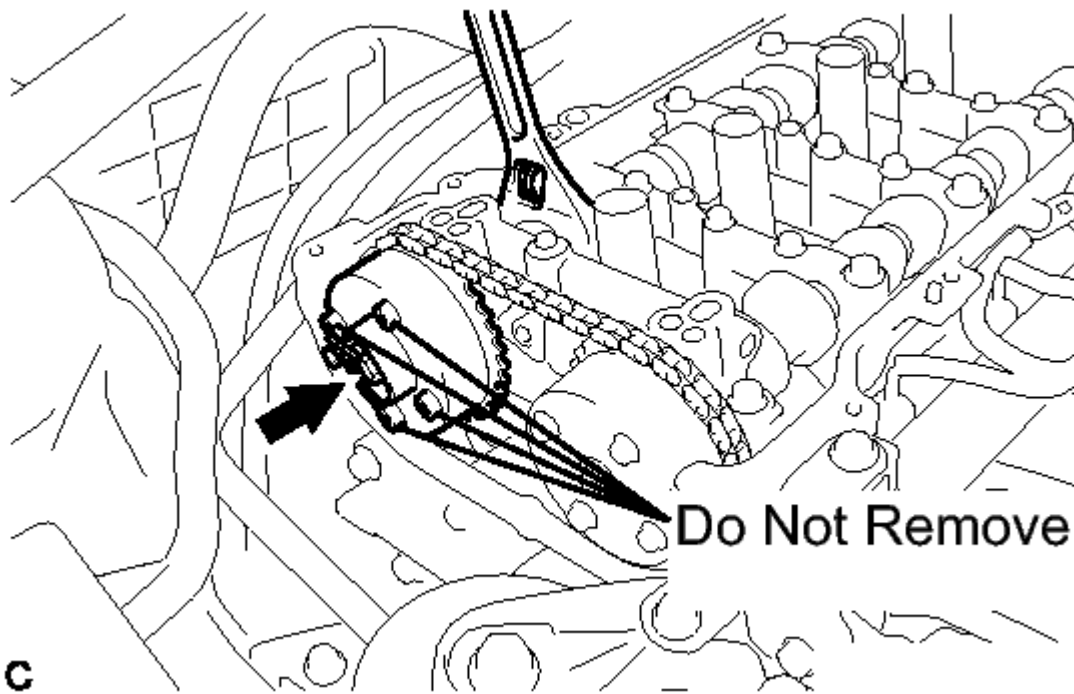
Removing Camshaft Timing Exhaust Gear Bolt
